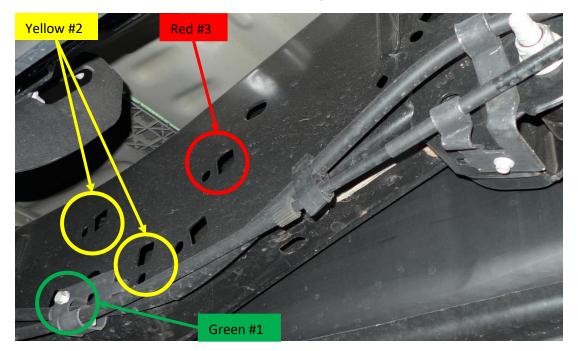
Main Horn Brackets Mounting Holes in Frame
